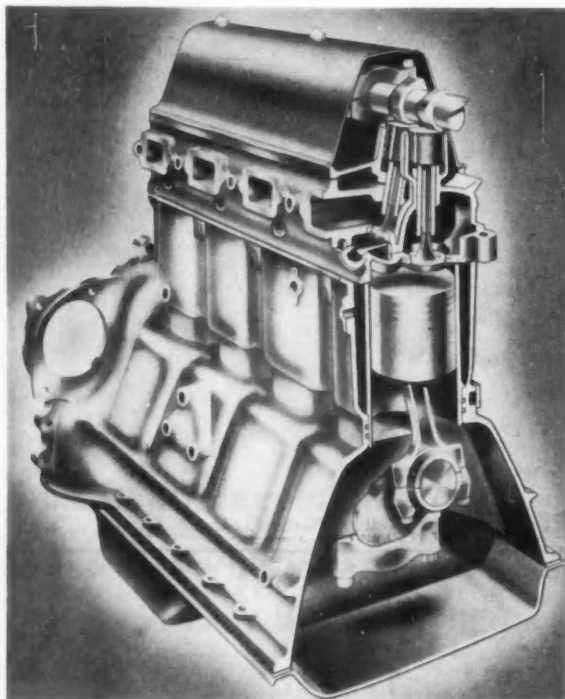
Isometric drawing of Kaiser-Frazer engine block showing die-cast design with wet sleeves and camshaft in the cylinder head.
